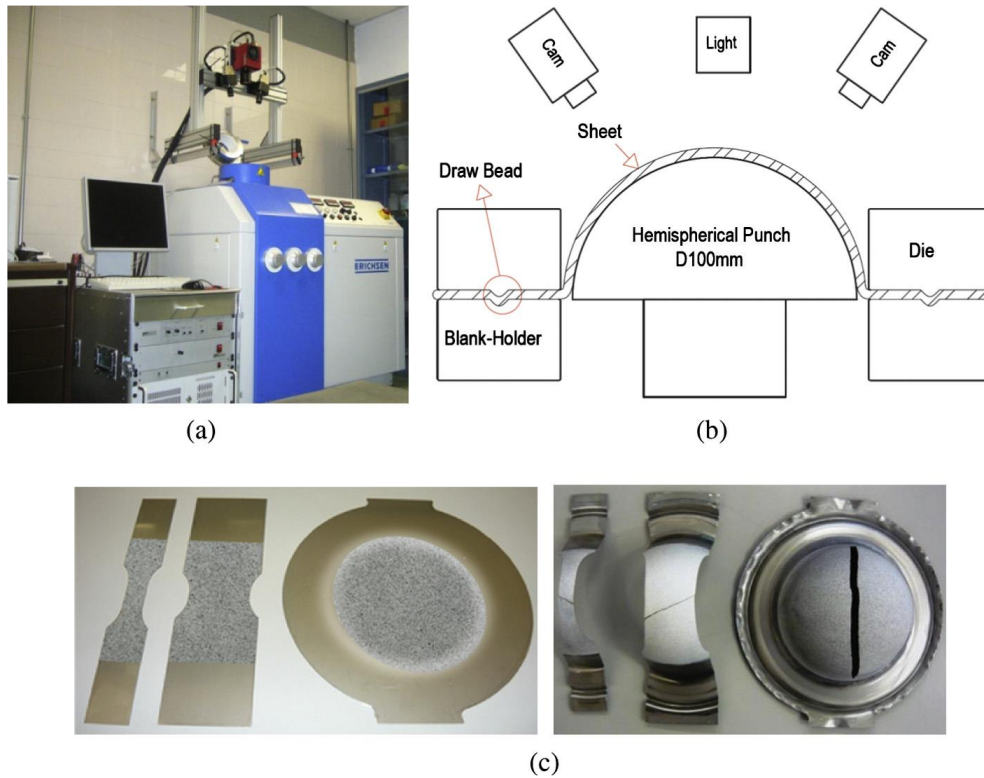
(a) *Erichsen universal sheet metal testing machine*, (b) *scheme of the experimental setup* and (c) *specimen geometries before and after testing
